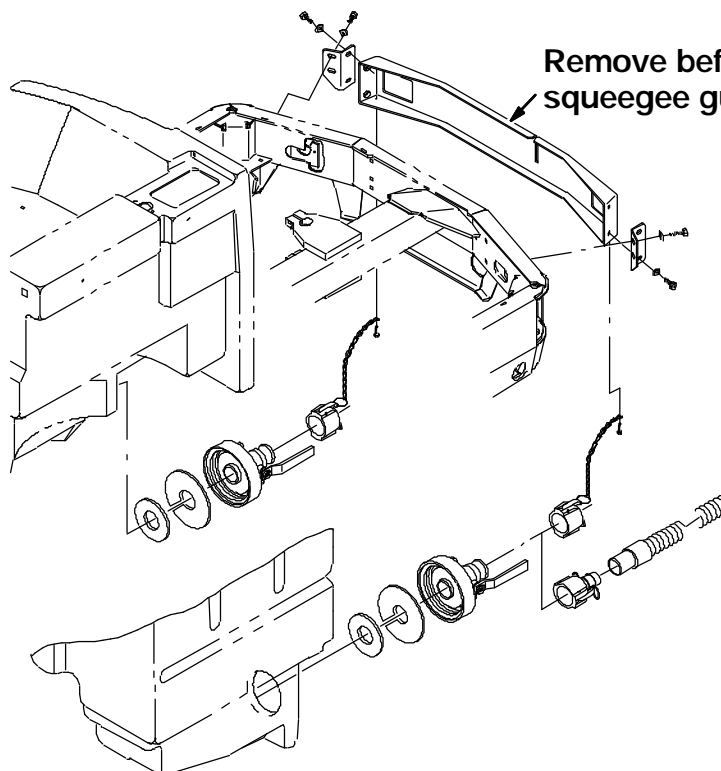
BUMPER REMOVAL ON EST MACHINE
